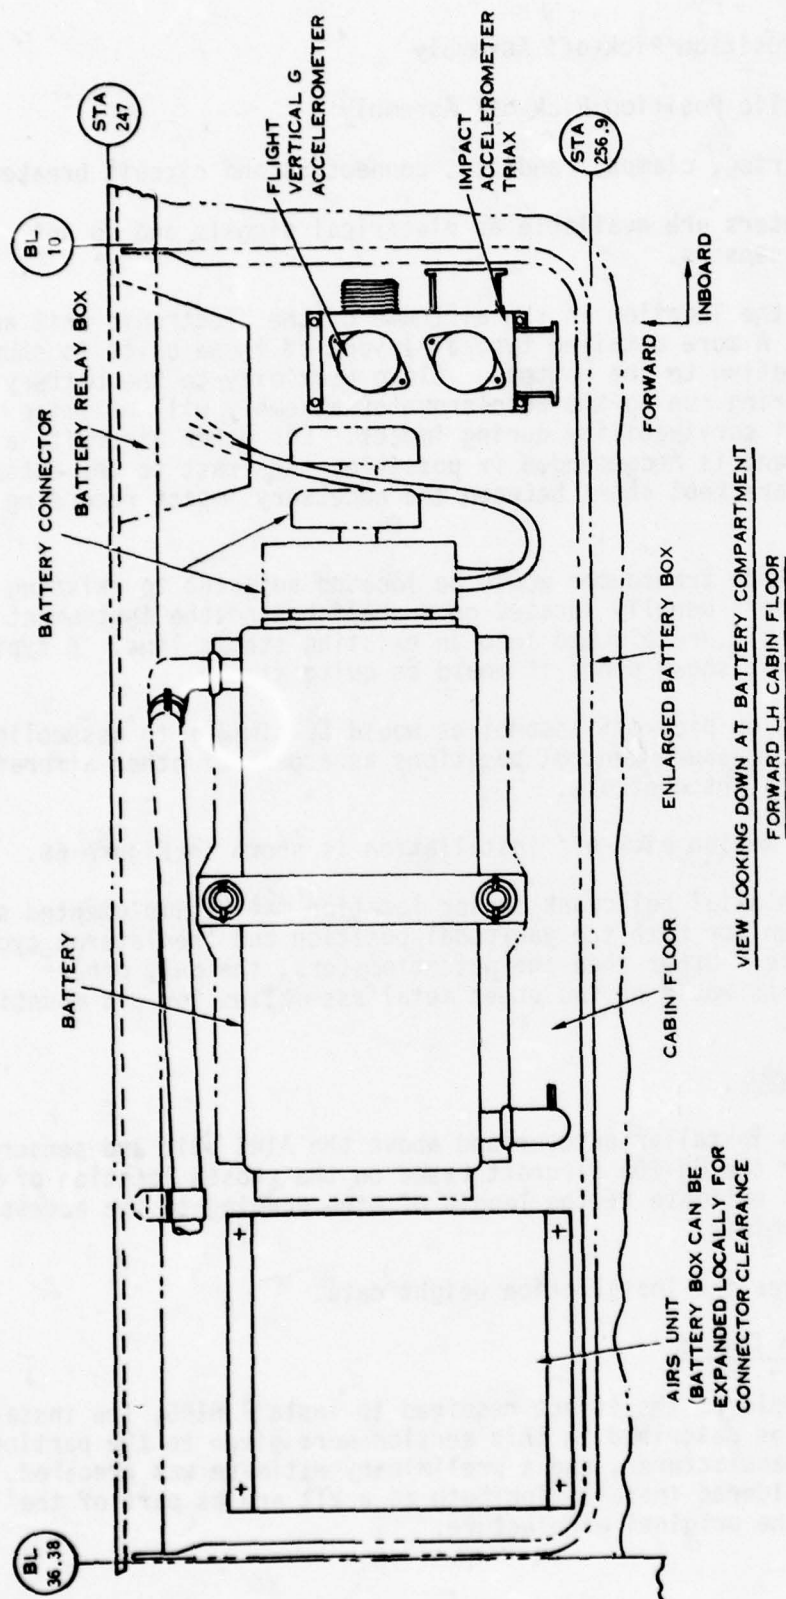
TYPICAL AIRS UNIT INSTALLATION
